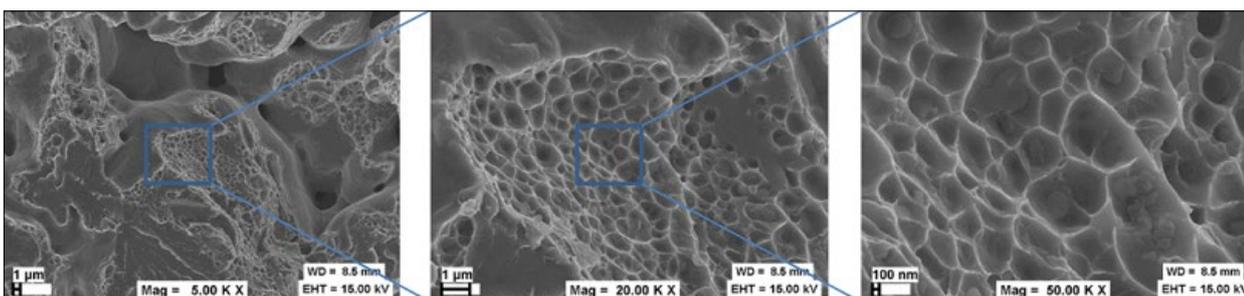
Fracture surface of sample sintered after delubrication at 450 °C in dry N₂[1] (Courtesy EPMA)
